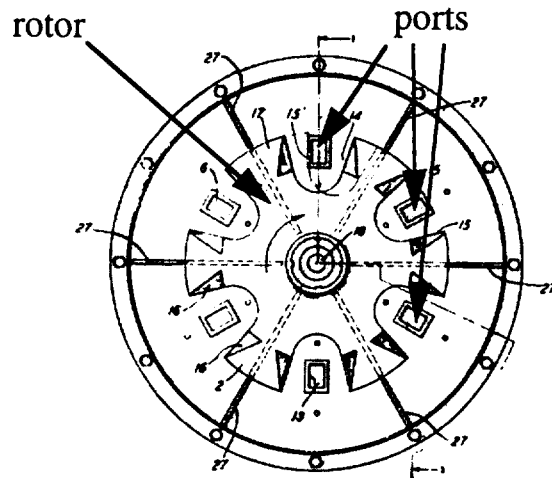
A sketch showing the shape of the rotor and its position with respect to the six ports, one of which is indicated by the number 13.
